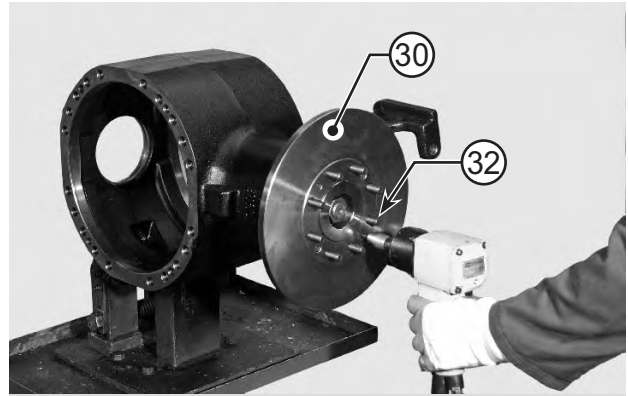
Draw out the screw (30) and remove the disk (32).
